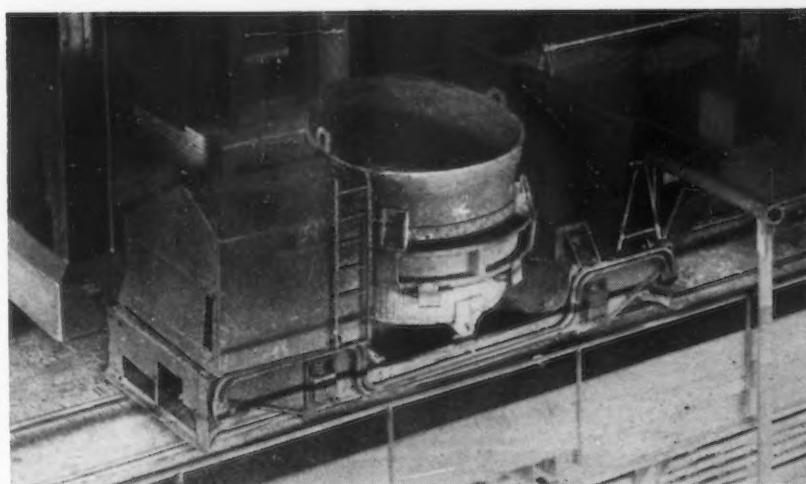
27-ton hot metal ladle car used for transferring and pouring molten metal in a steel plant. Electric powered car operated by remote control. Car by Pennsylvania Engineering Co.; electrical equipment by Westinghouse.
